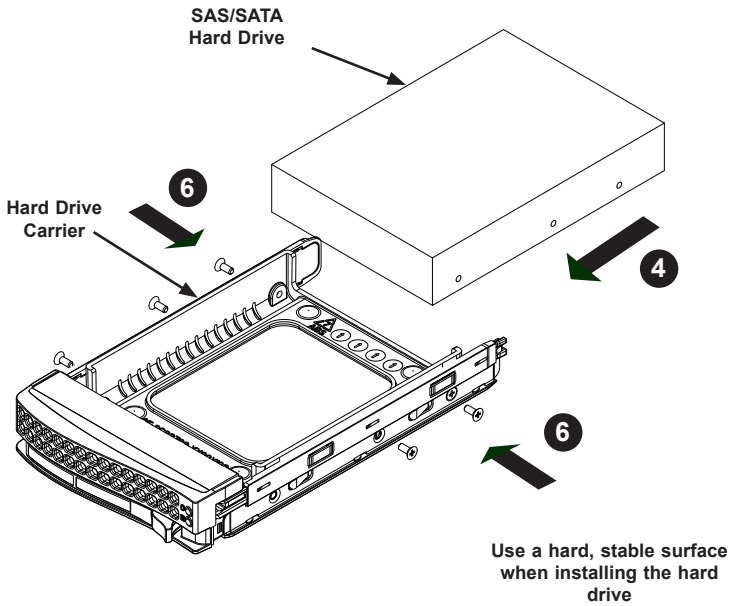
Installing a Drive into a Hard Drive Carrier
